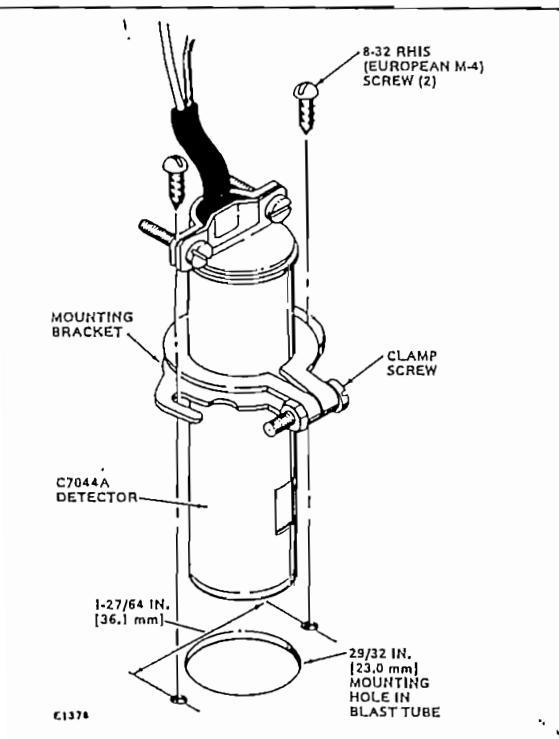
MOUNTING A C7044A ON A BLAST TUBE.
